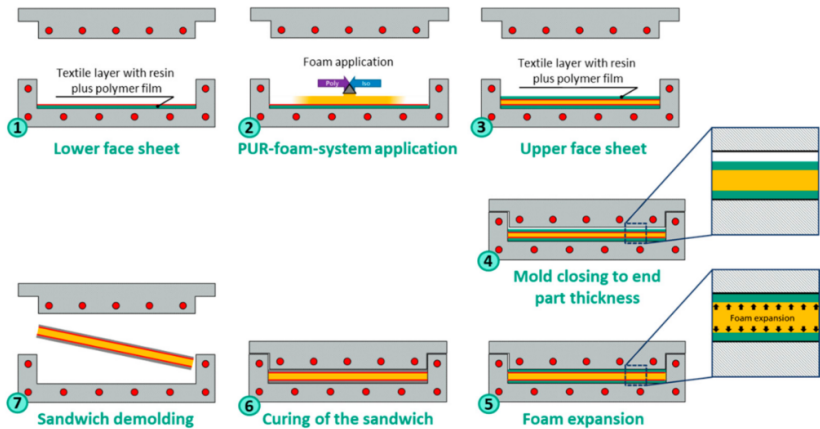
The D-SCM process with 7 manufacturing steps [18]; (1) Placement of the lower sheet inside the mold; (2) Application of the reactive polyurethane foam mixture; (3) Placement of the upper sheet inside the mold; (4) Mold closing; (5) Foam expansion and impregnation; (6) Curing; (7) Demolding [18]
